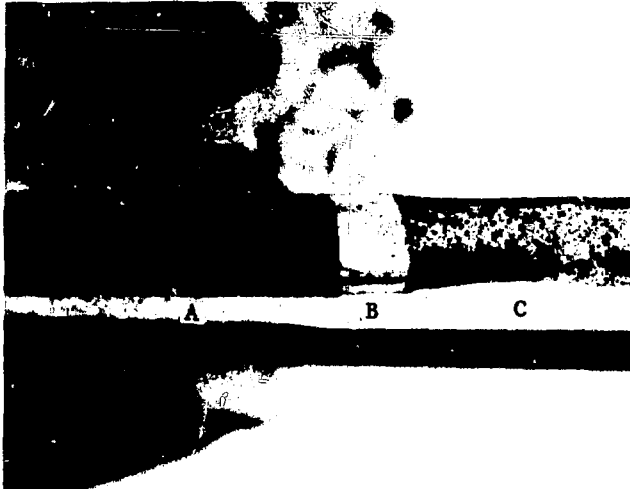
BURST TEST FRACTURE SHOWING AT A, THE EDM SLIT, AT B, THE FATIGUE CRACK EXTENSION AND AT C, THE FAST FRACTURE
